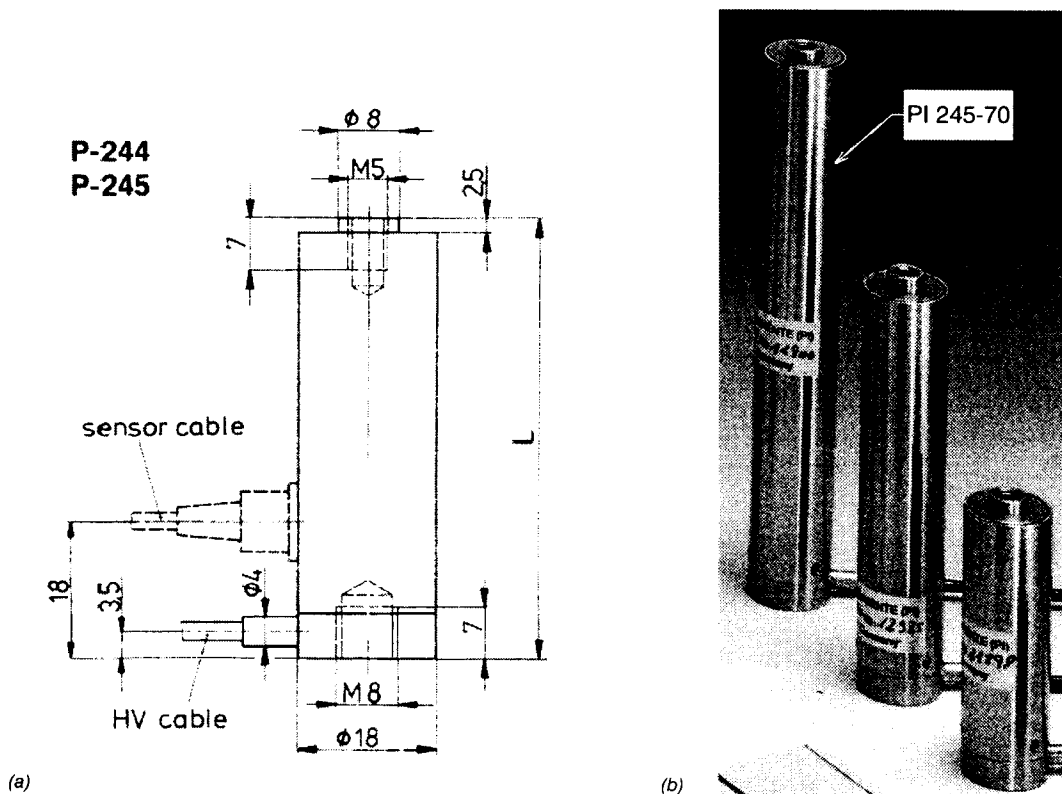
(a) Assembly drawing of P-245.70 translator. (b) Photograph of the P-245.XX translator family (courtesy Polytec PI, Inc.).
